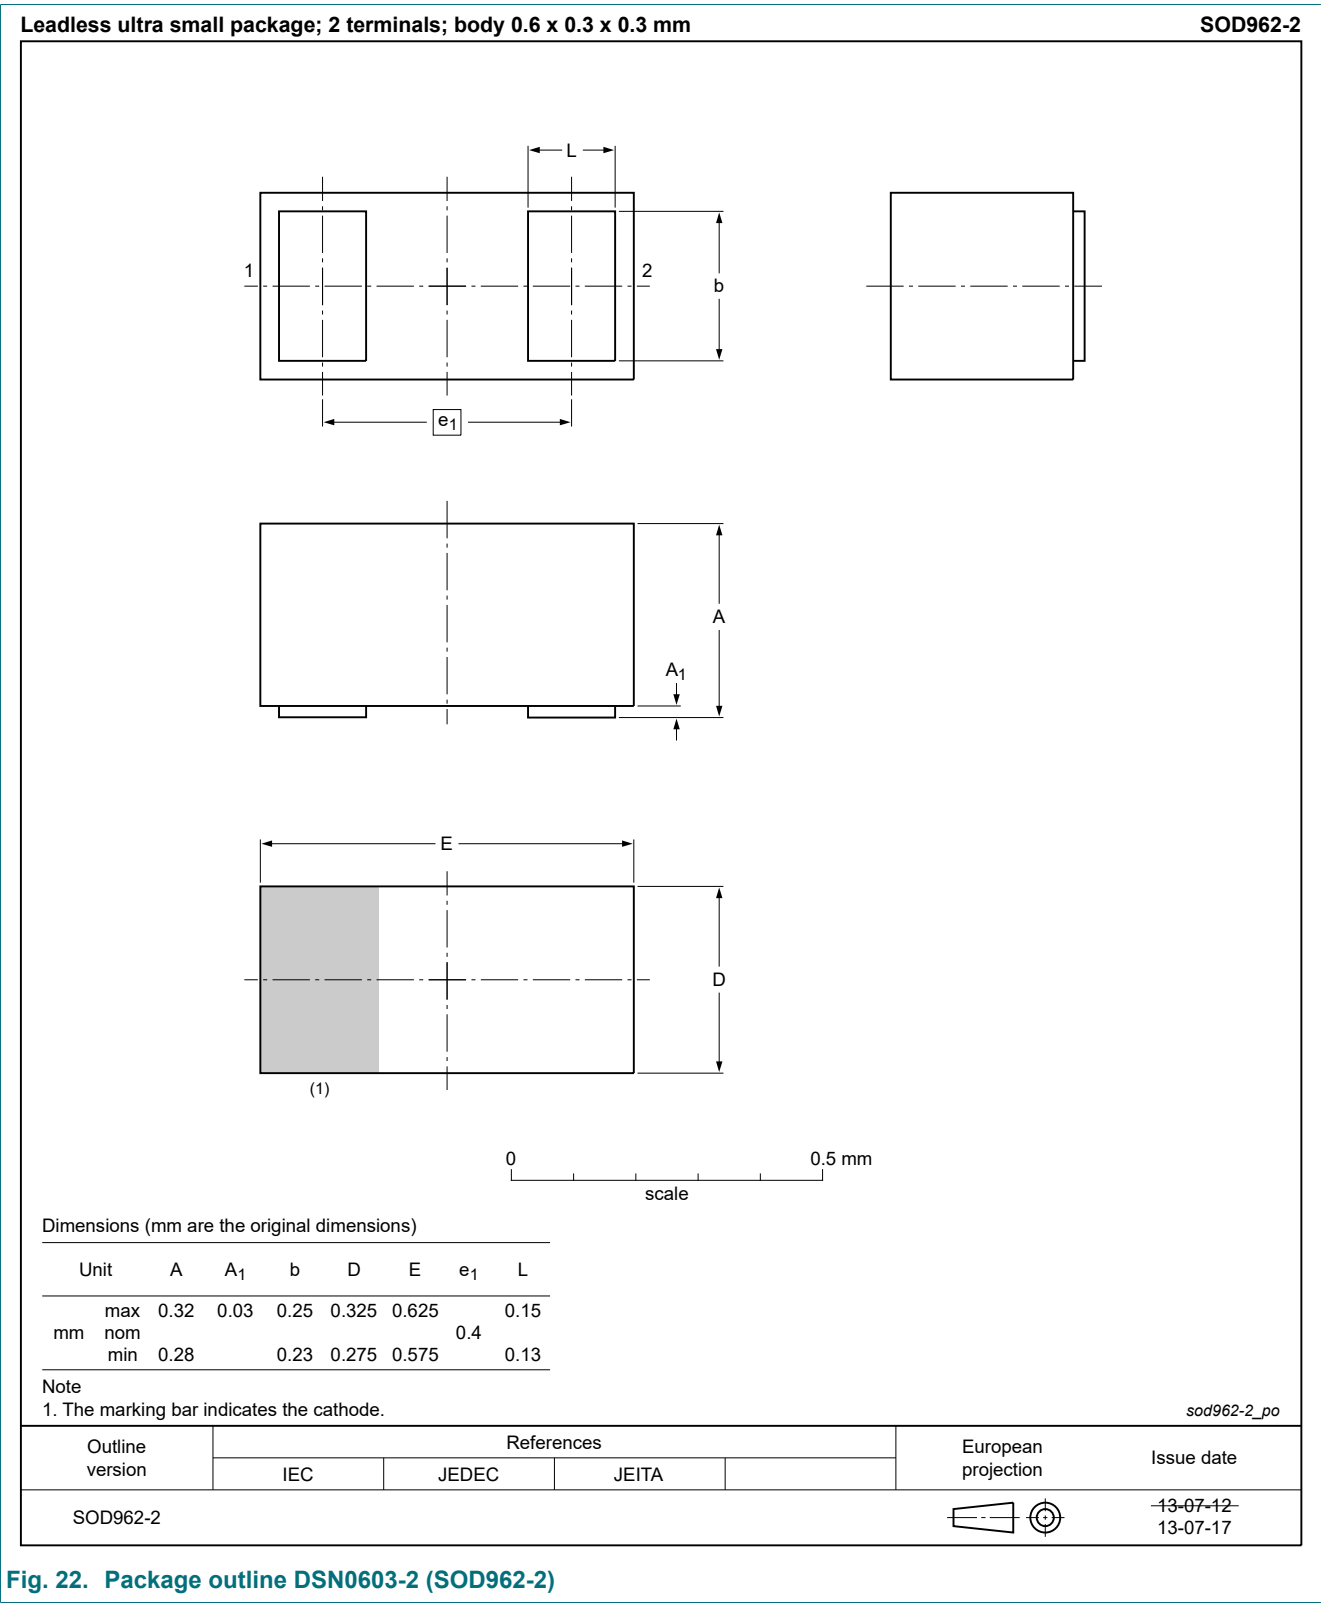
Package outline DSN0603-2 (SOD962-2)
